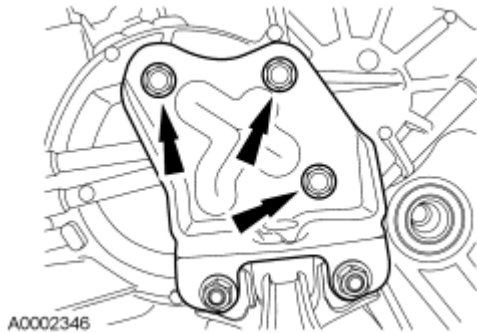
Identifying Upper Transaxle Mount Retaining Bolts
